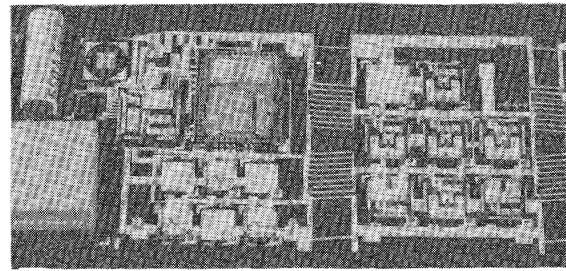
Prototype microinstrumentation system using a silicon micromachined platform assembly.
